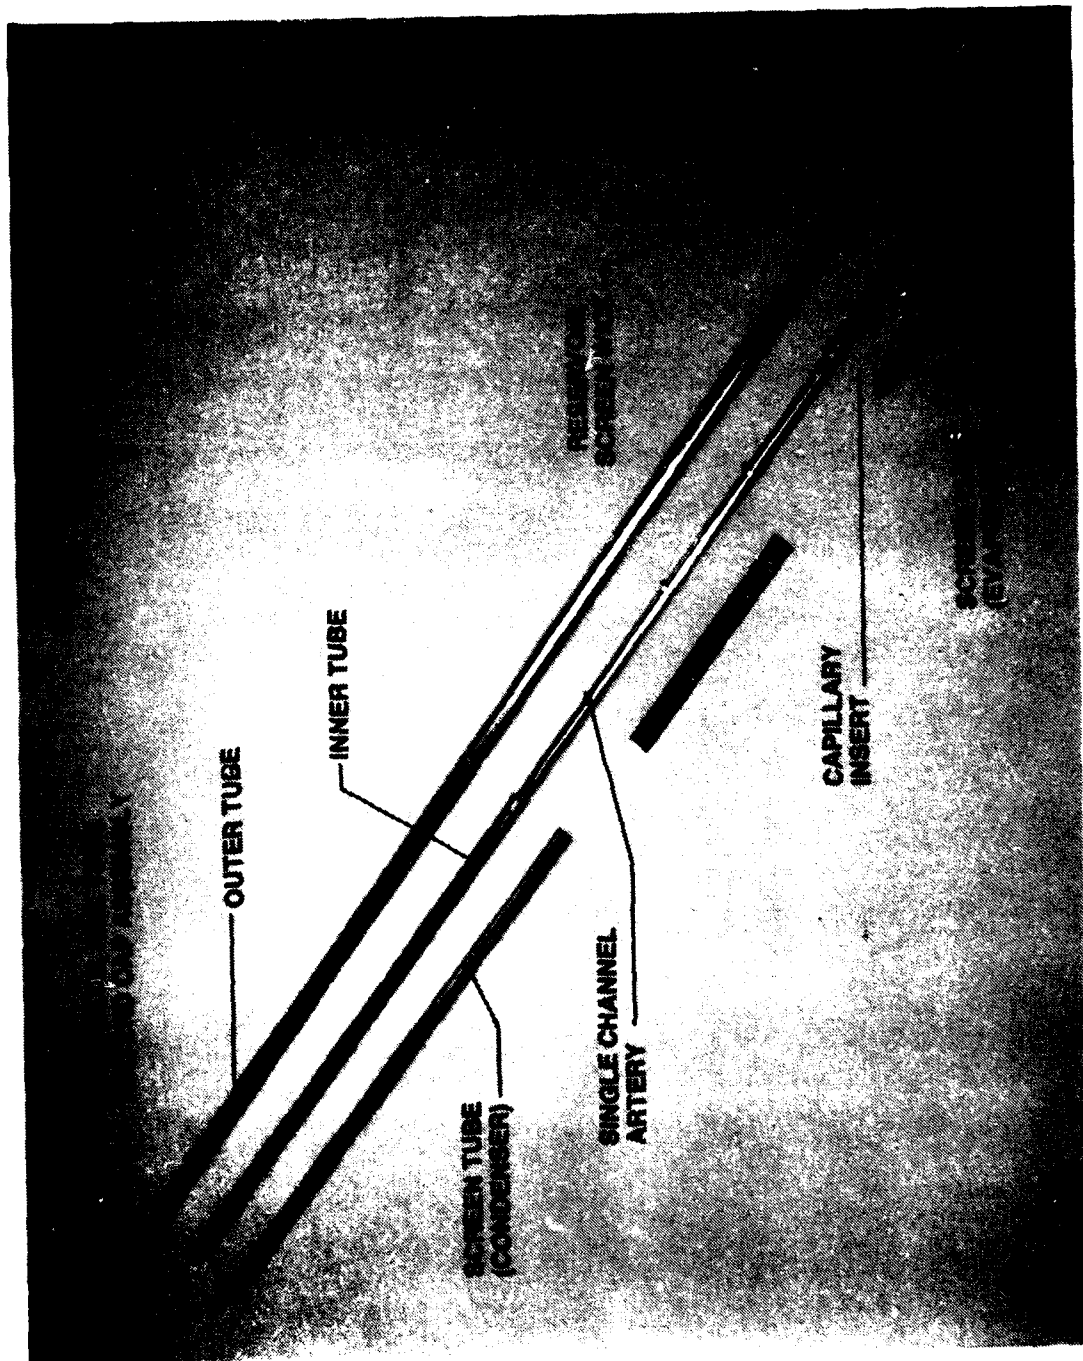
Photograph of the Heat Pipe Parts Laid Out Before Assembly
